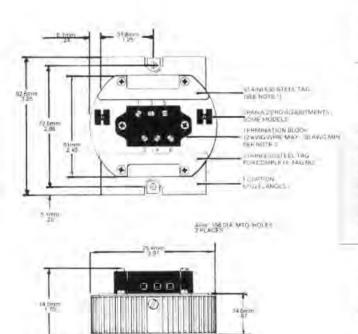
STANDARD UNIT & DIMENSIONS
